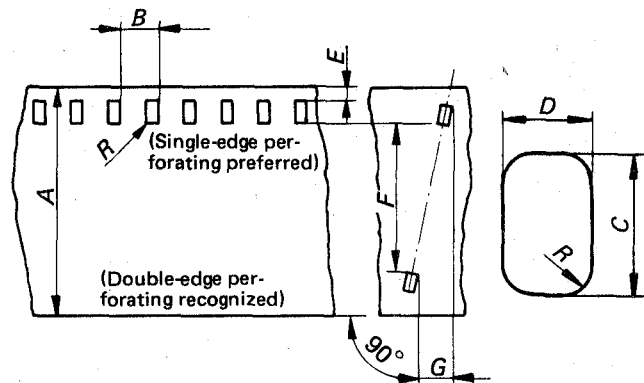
Perforating dimensions of films (in rolls) used in phototypesetting and photolettering devices
